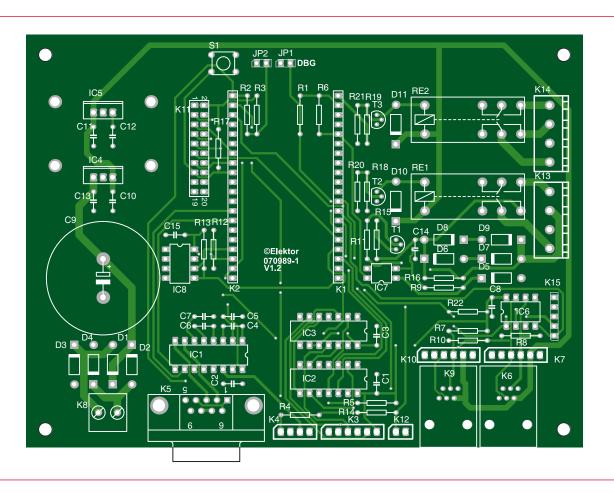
The PCB is designed with a spacious layout to make assembly easy.
